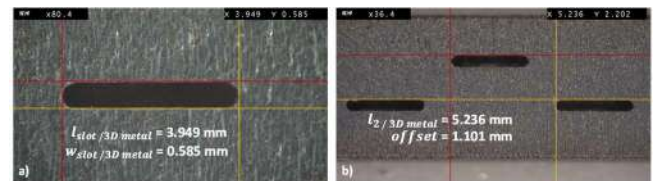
The microscope views of the fabricated 3D metal printed antenna with their geometrical dimensions.
